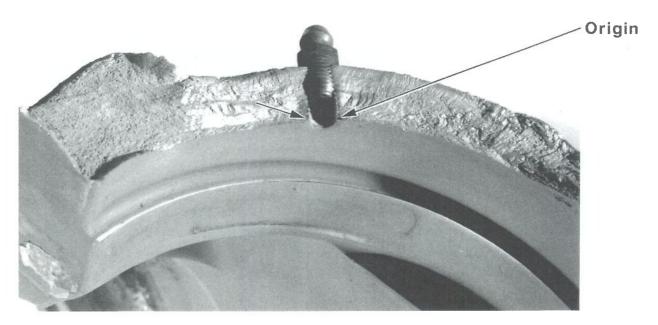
Fatigue cracked region on the inner half of the hub fracture
